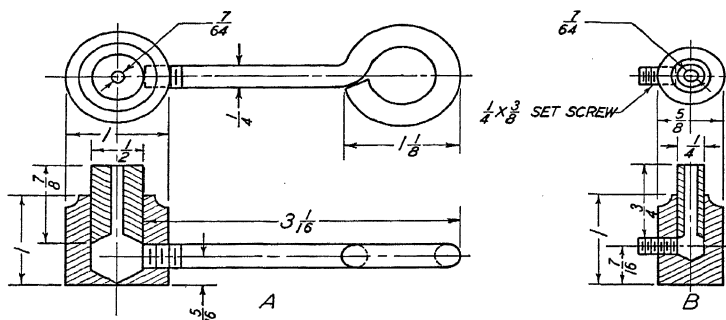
Drilling jigs: (a) Centering and drilling jig for $\frac{1}{2}$ " spheres, (b) Centering and drilling jig for $\frac{1}{4}$ " spheres.
